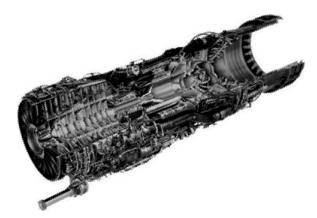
PW J58 Mach 3-plus turbojet engine shown with primary nozzle (courtesy of P&W).
